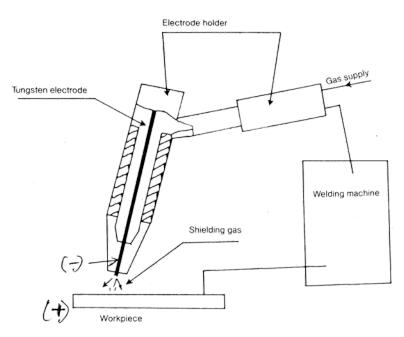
GAS-TUNGSTEN-ARC WELDING PROCESS
